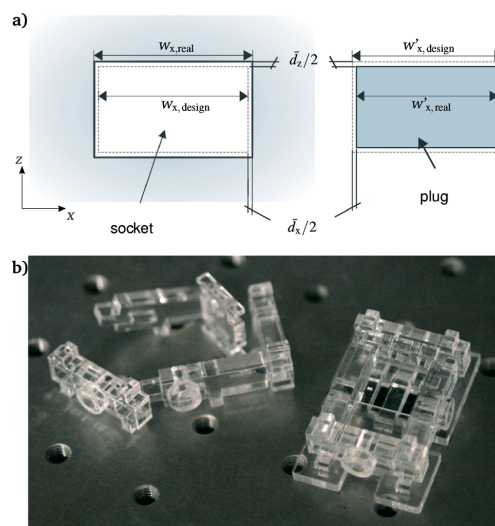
a) Schematic illustration of the design schemes for the laser cutting of plugs and sockets and b) photograph of the laser-fabricated constituent parts and the fully assembled CWI.
